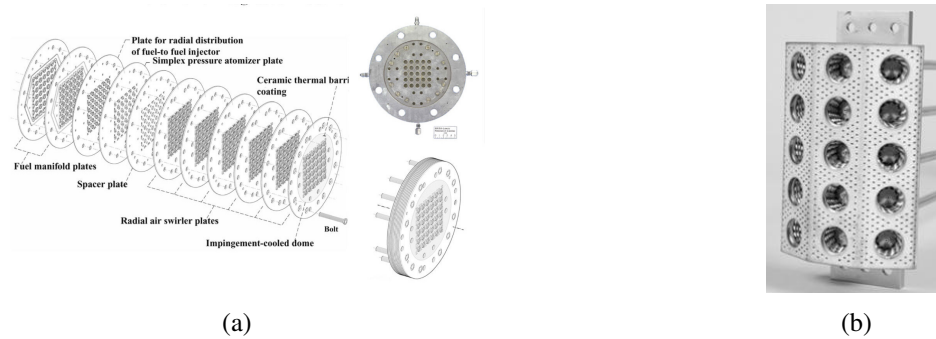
Macrolaminate LDI. Part a shows the first macrolaminate LDI configurations, with a  $76.2\text{-mm} \times 76.2\text{-mm}$  cross-sectional area containing (top, photograph) 25 injectors in a  $5 \times 5$  array or (side, bottom, drawings) 36 injectors in a  $6 \times 6$  array. Part b shows a later 3-zone macrolaminate configuration.
